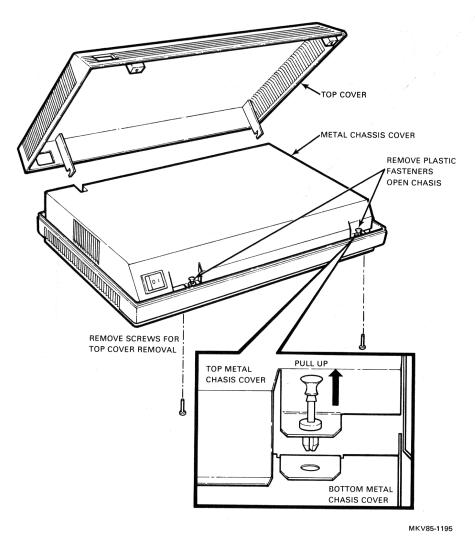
Top Cover Removal/Opening and Closing the Internal Metal Chassis
